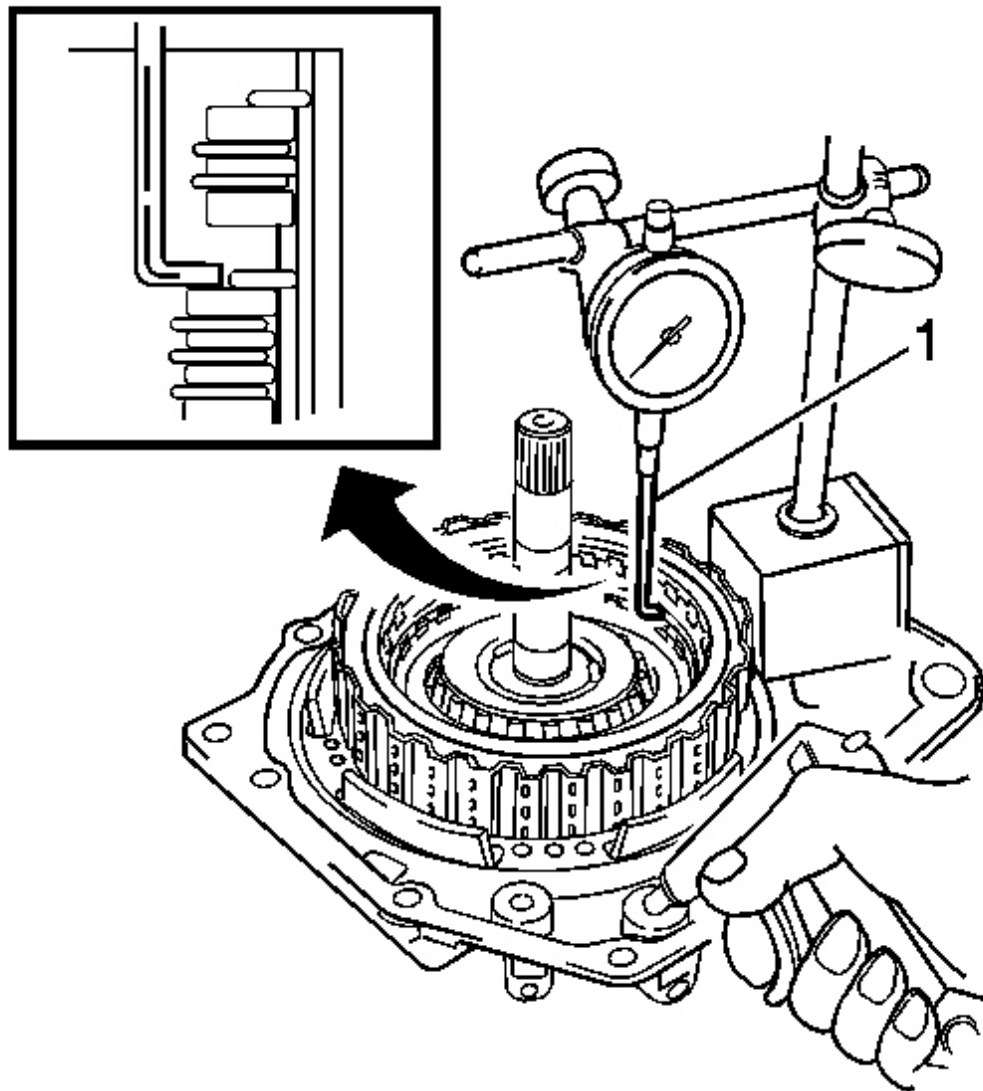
Measuring Forward Clutch Pack Clearance While Applying Compressed Air
